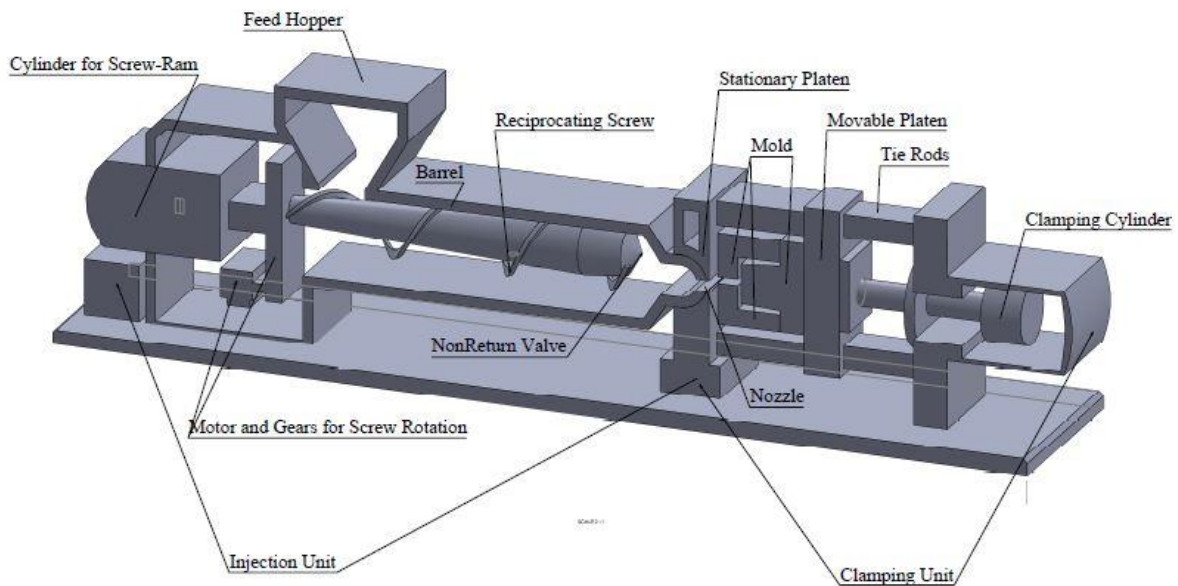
Injection moulding machine for the production of thermoplastic parts with its different parts identified.
